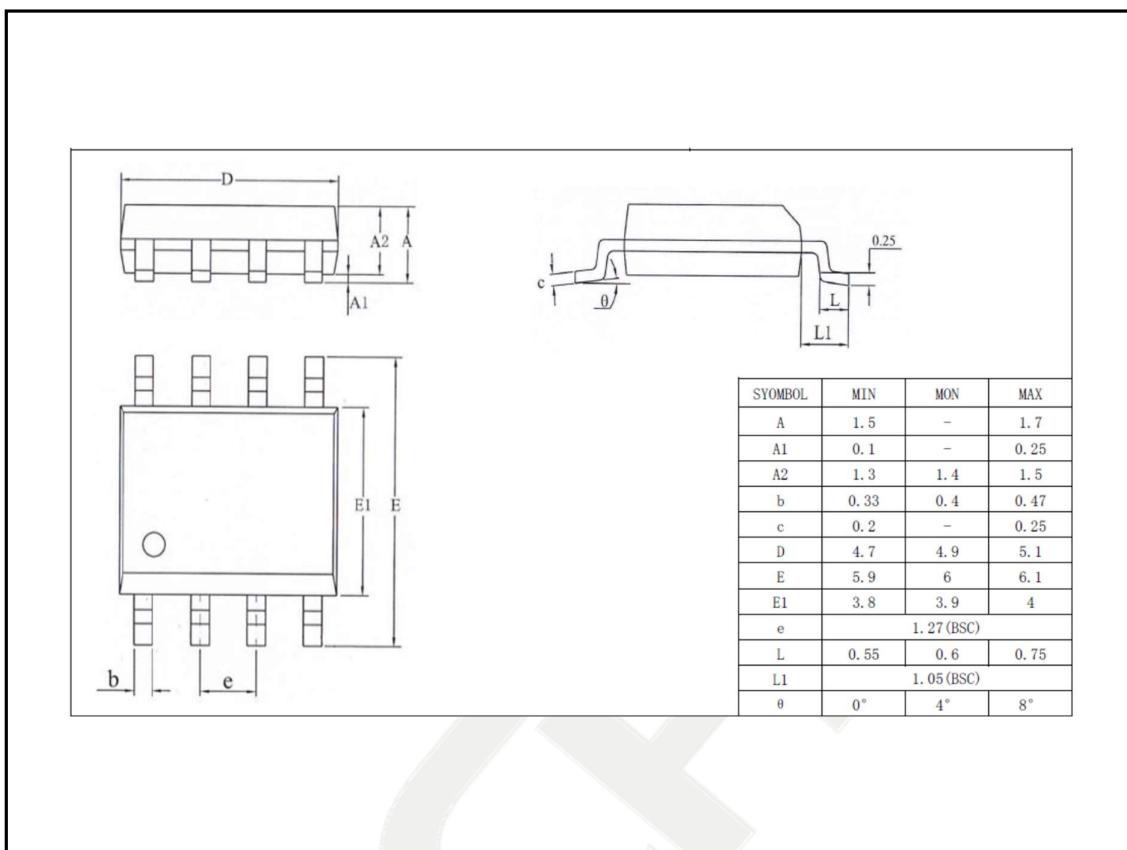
SOT23-8L Mechanical Data and Package Dimensions
